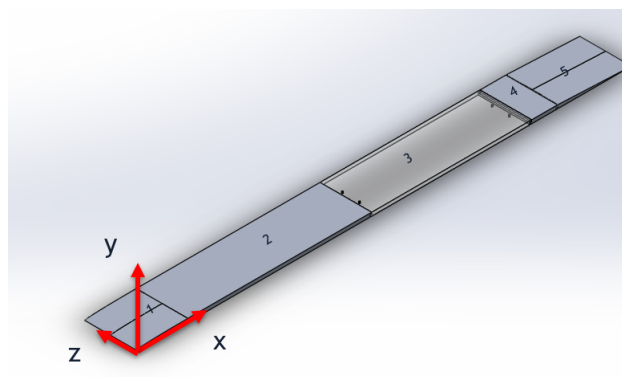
Entire Flat Plate CAD for 3.65-meter Test Section
